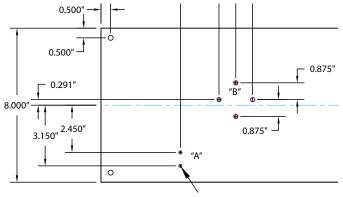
Chucker Lathe Base diagram shown for reference. See last page for full diagrams of the Chucker Lathe Base (P/N 88323) and the Ball Screw Lathe Base (P/N 883241)
